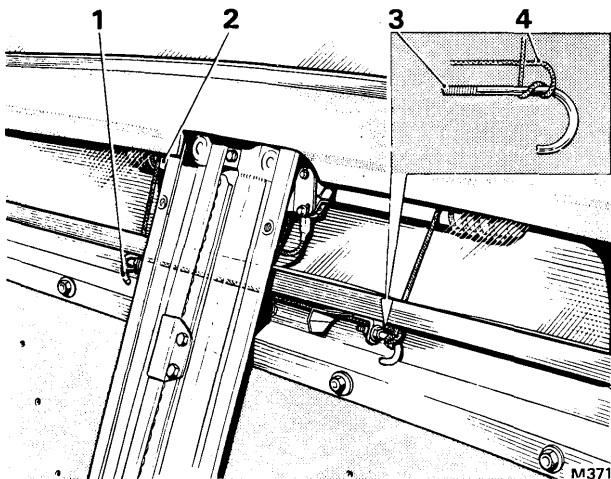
METHOD OF ATTACHING THE ROLLER CORD TO THE DIVISION GLASS PICK-UP PLATE
